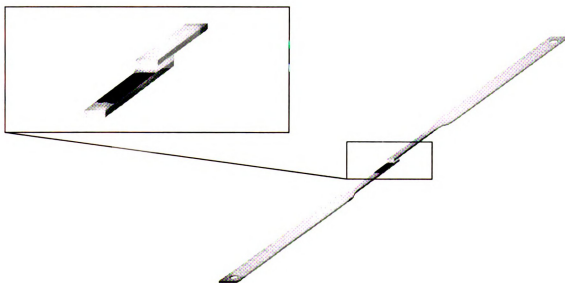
Finished Solder Joint with Magnified View of Joint Area.
